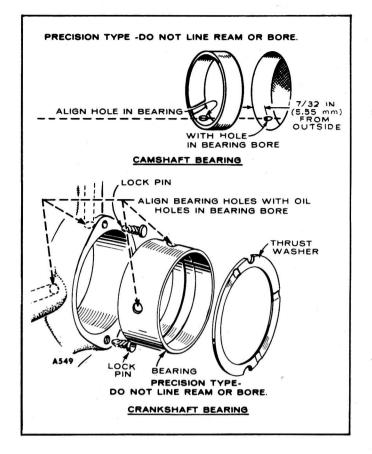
INSTALLATION OF CAM AND CRANKSHAFT BEARINGS
